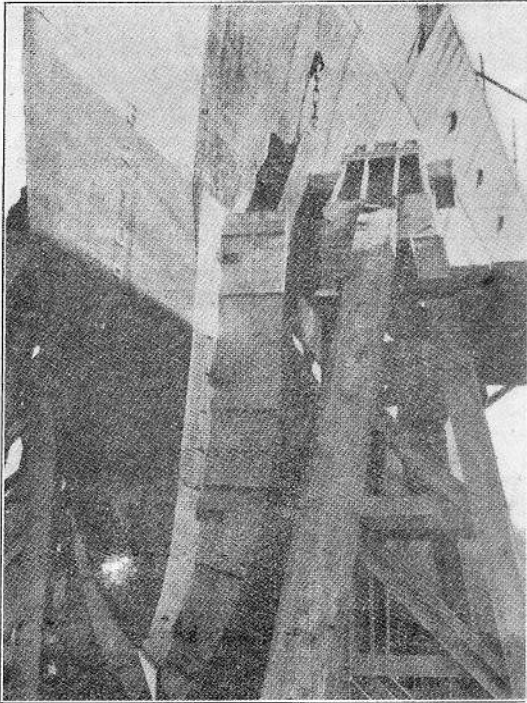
Sagging Test. Detail of Forward Support showing Method of supporting Forward Cradle Strap with Shaft and Offset between Forward Edge of of Strap and Hull.
